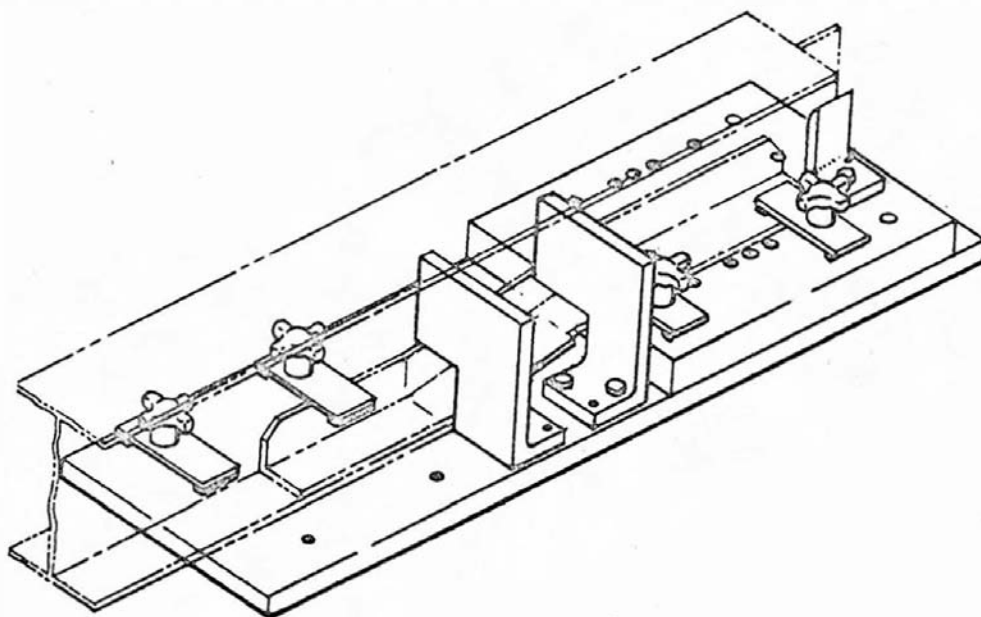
10. Base Heatshield Beam Assembly, Assembly Fixture
